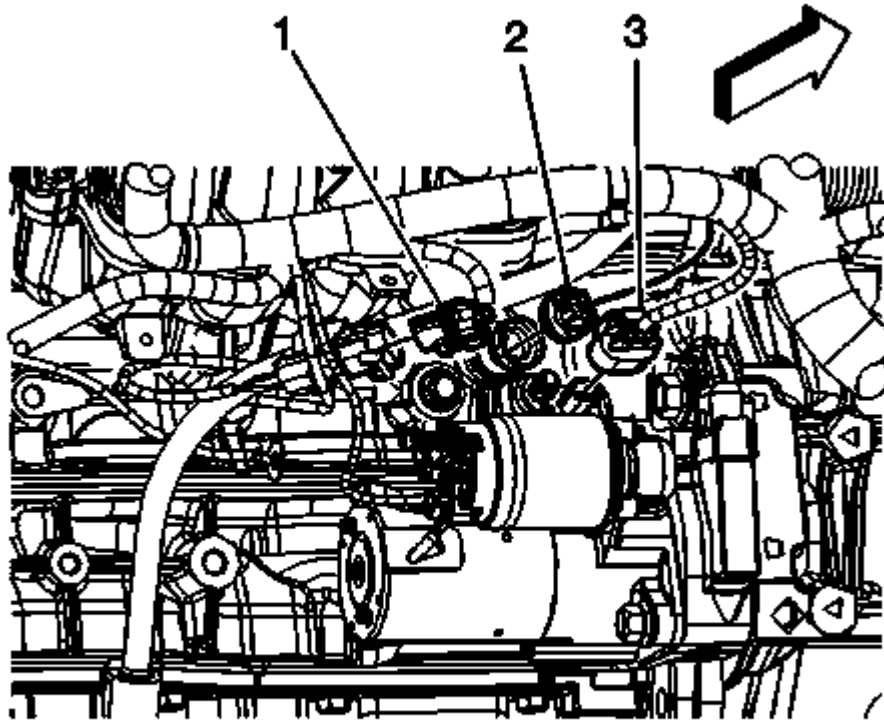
Identifying Engine Oil Pressure Sensor, Knock Sensor & CKP Sensor Electrical Connectors
